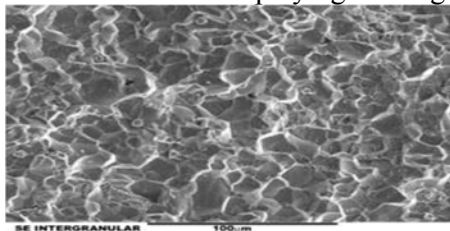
Intergranular fracture of an embrittled cast steel pneumatic wrench. [3]
